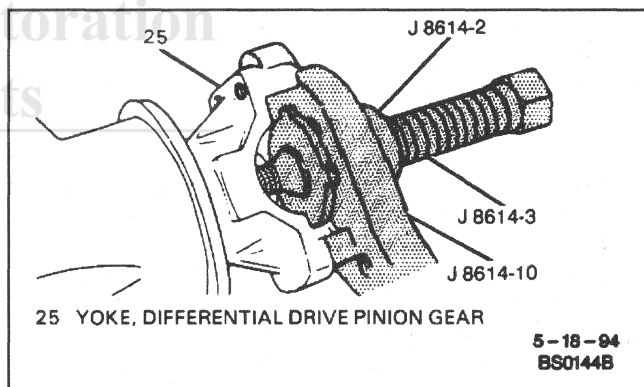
Removing Differential Drive Pinion Gear Yoke
